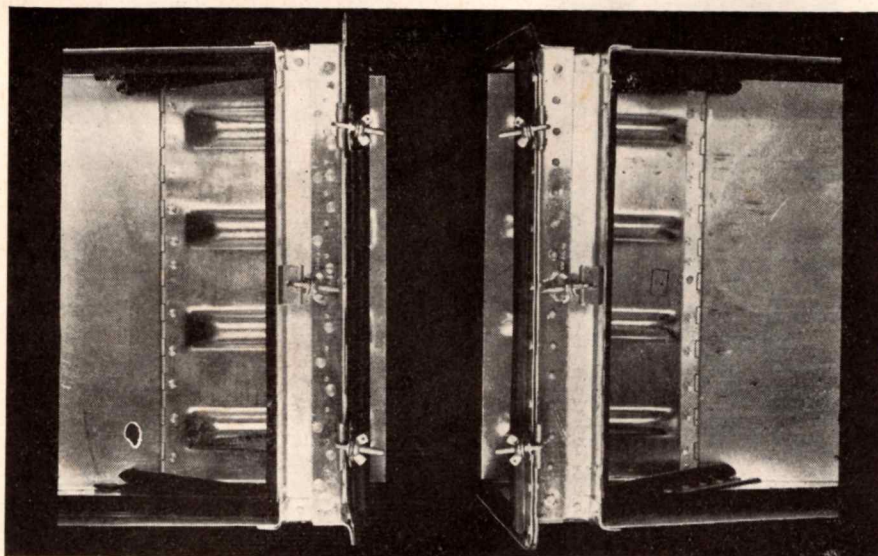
Here the rubber-like extrusions shown in fig. 6 are riveted
